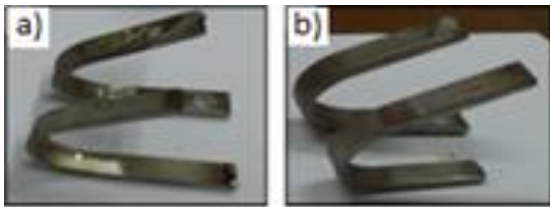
, Bent specimens of FSW welded joint, and repaired by a) SMAW joint Sp1R, b) GTAW joint Sp2R
